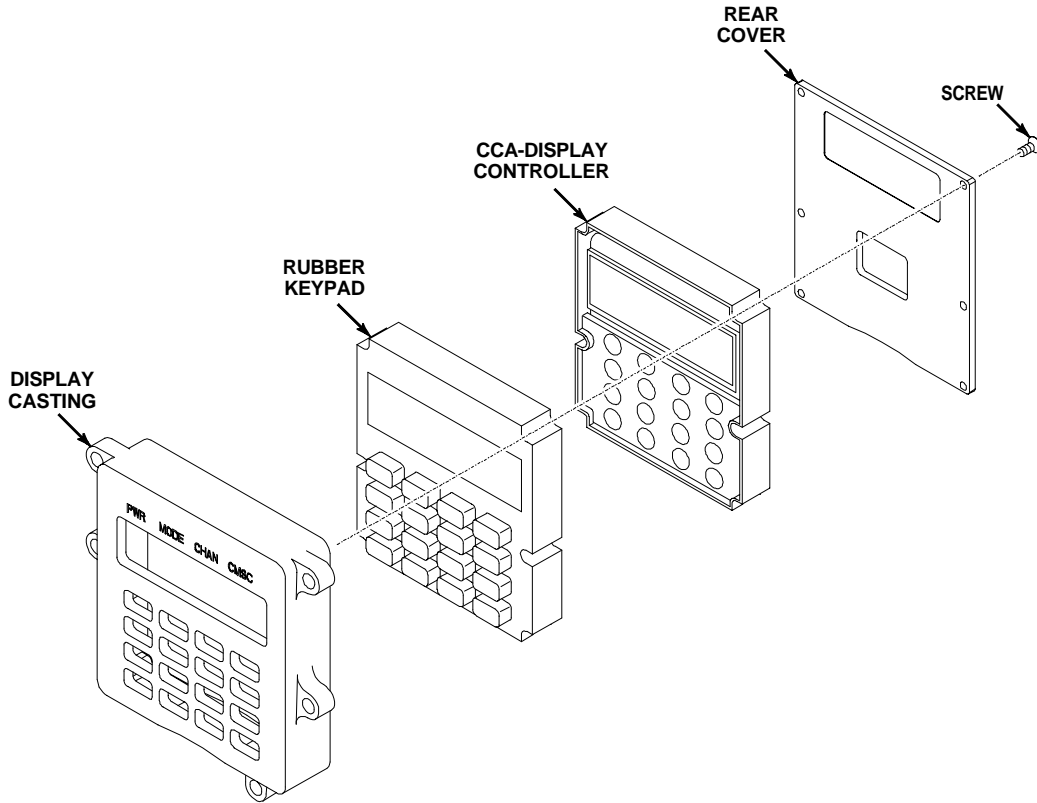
Disassemble/Assemble Display/Keypad Assembly.
